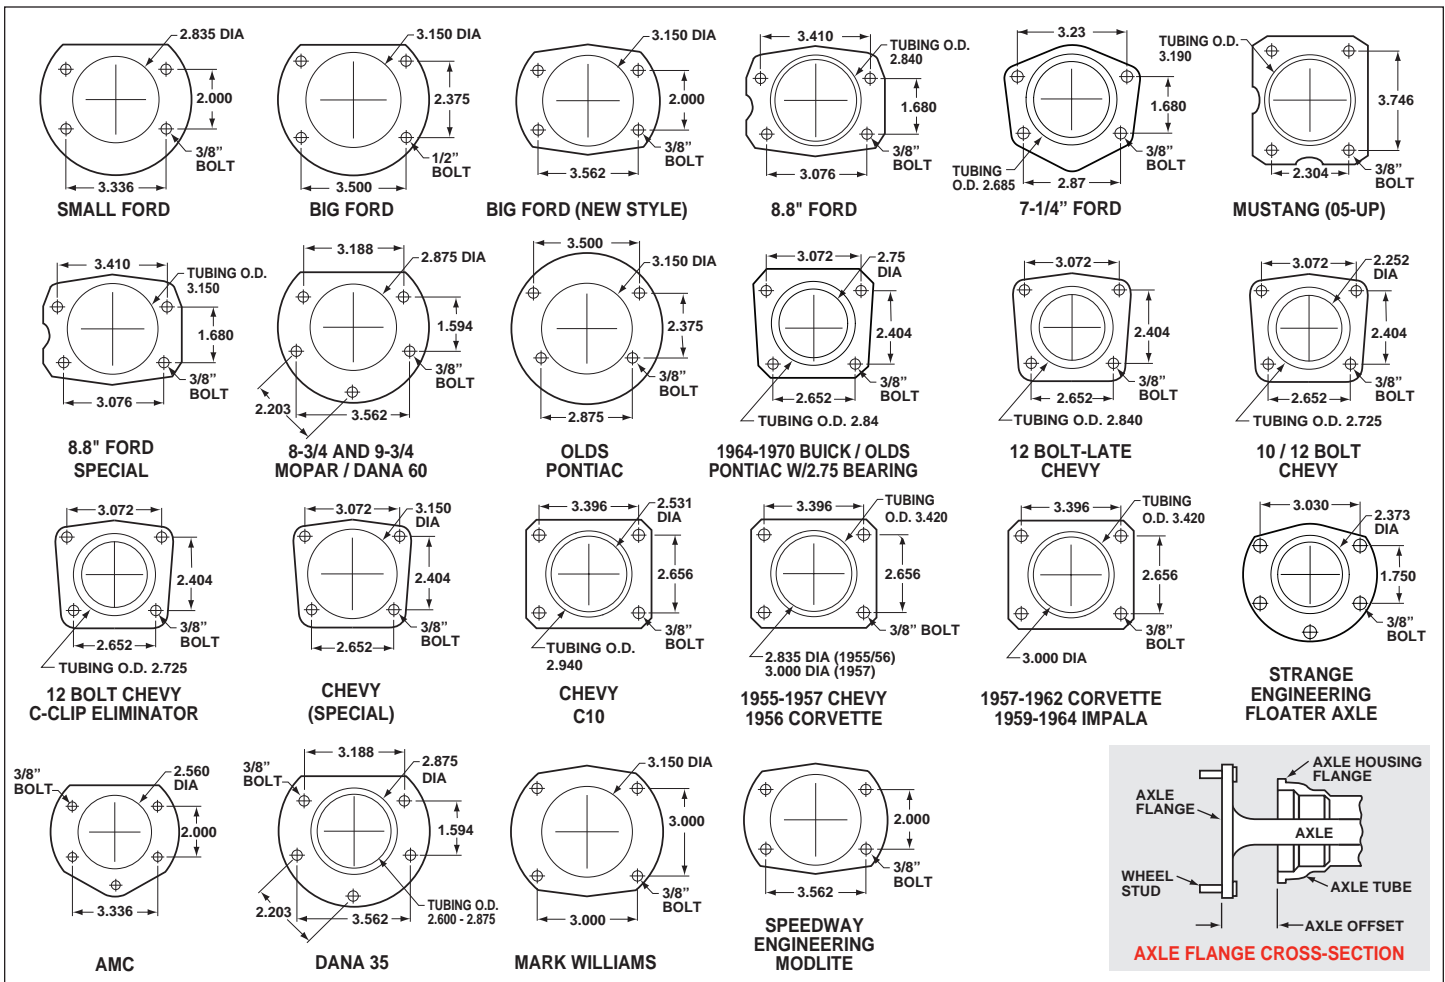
Rear Housing Flange Chart and Axle Flange / Offset Cross-Section
